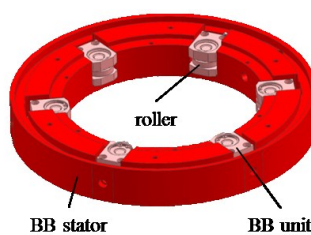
Test rig planetary BB with 6 BB units with each two ball bearings and one roller
